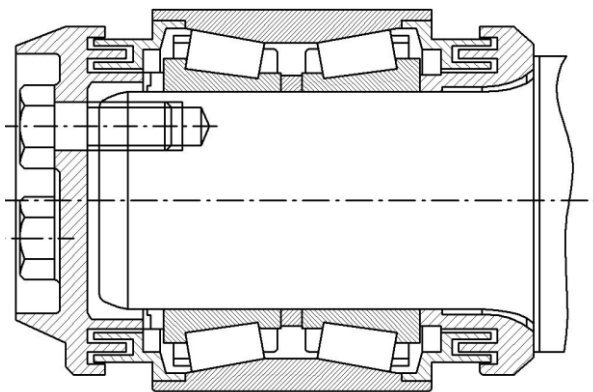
A non-housing axle box without housing with a double-row conical bearing
